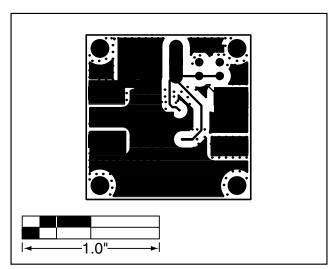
MAX2645 EV Kit PC Board Layout—Solder Side
